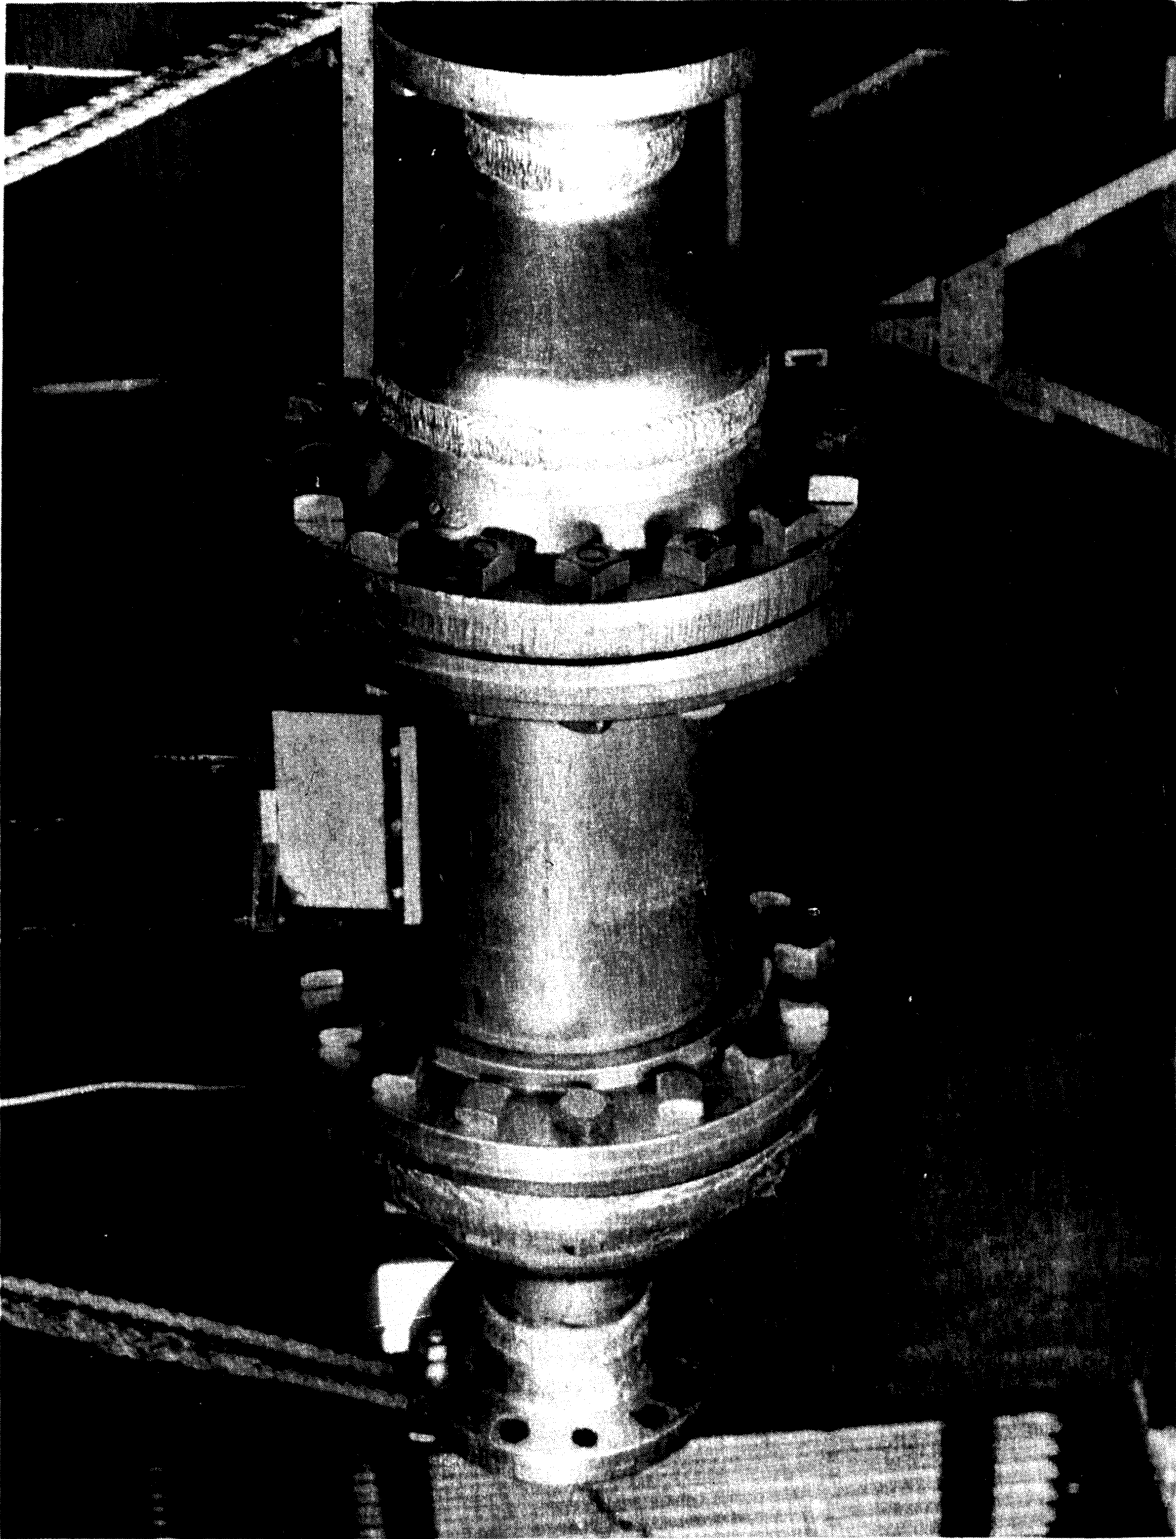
Photograph of Assembled Segmental Butterfly Valve
